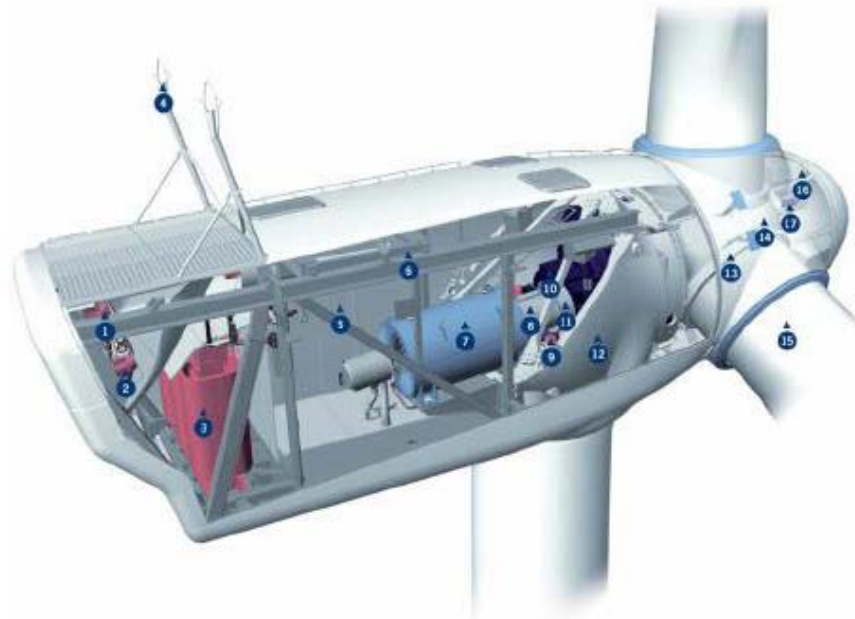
Nacelle Vestas V90 3MW. Note: 1= oil cooler; 2 = generator cooler; 3 = transformer; 4 = ultrasonic wind sensors; 5 = VMP-Top controller with converter; 6 = service crane; 7 = generator; 8 = composite disc coupling; 9 = yaw gears; 10 = gearbox; 11 = parking brake; 12 = machine foundation; 13 = blade bearing; 14 = blade hub; 15 = blade; 16 = pitch cylinder; 17 = hub controller. (Reproduced by permission of Vestas Wind Systems A/S, Denmark)
